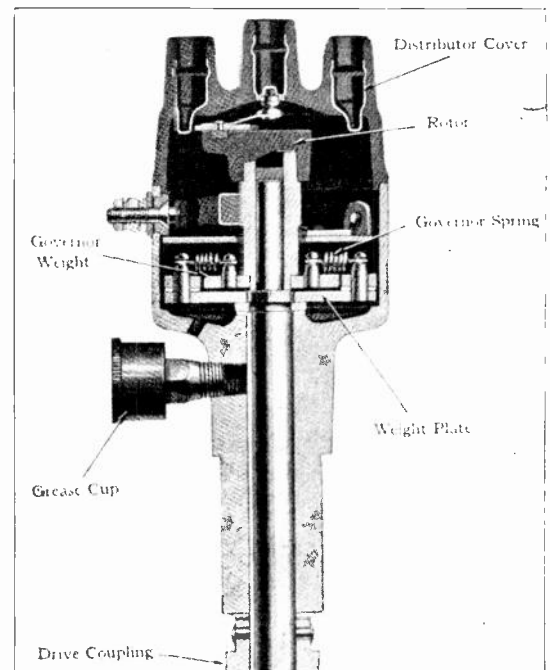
Side sectional view through a distributor with automatic spark advance mechanism shown in the lower part and secondary rotor and contacts shown in the upper part.
